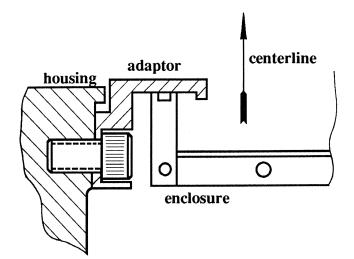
Redesigned Enclosure-to-Compressor Seal.
